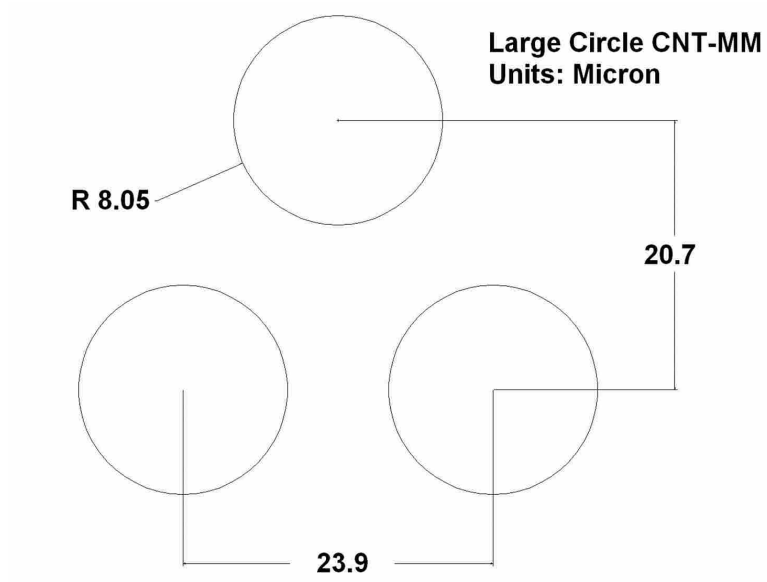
Large circle pattern; Hydraulic diameter is 16.1 [μm].
